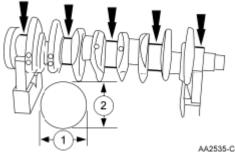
Locating Crankshaft Main Bearing Journal Diameters Courtesy of FORD MOTOR CO.
